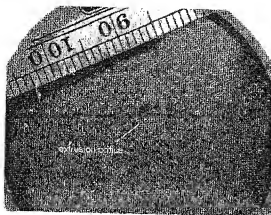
Shows that the 4 mm hole in the polycarbonate sheet is clearly visible through the bottom of the sheet.
